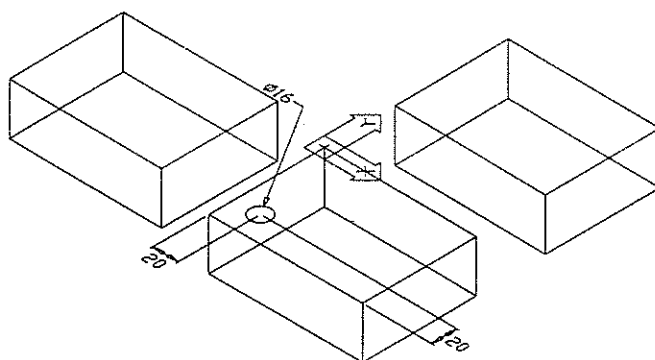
Circle constructed and resolved, parametric dimensions added
